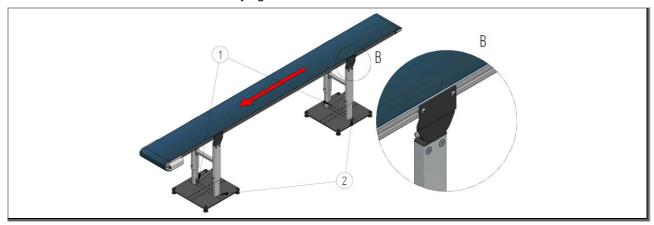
Overall construction assembly conveyor with support BE 010 – BM 010 (typical)
